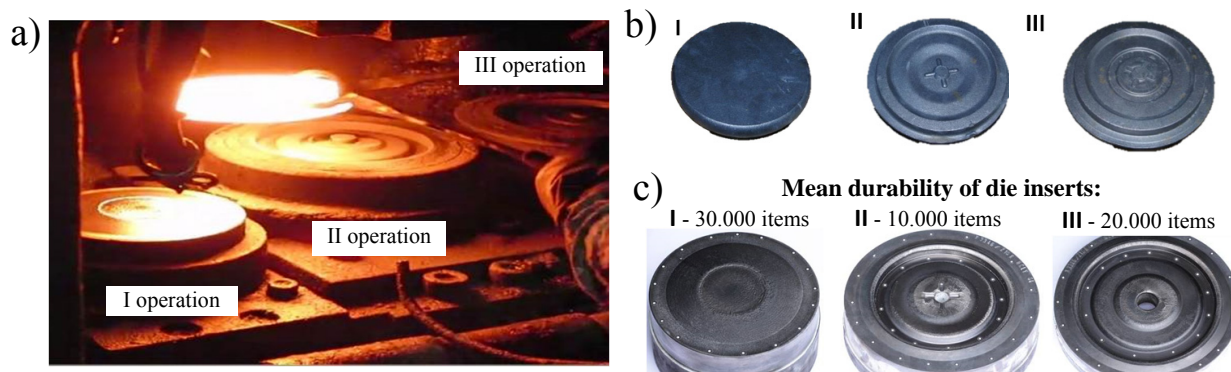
a) General view of the die forging of a wheel, b) preform and forgings in particular operations, c) lower die inserts from operation: I – upsetting, II – preliminary forging, III – finishing forging
